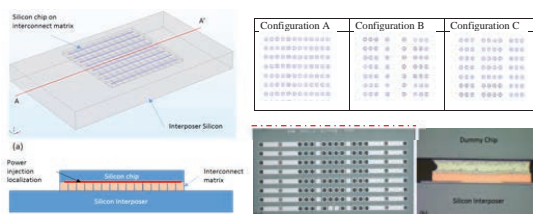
Vehicle test architecture (left) and Si interposer top view in bump configuration C with cross section view of a macro copper SnAg solder pillar (right).
